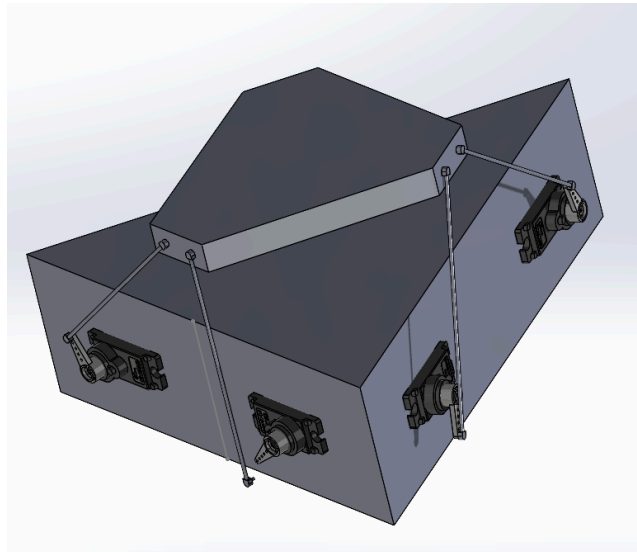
Prototype Stewart Platform design utilized in the above full system CAD. Utilizing 6 hobby servos to give a good range of motion for the system. Top piece will be replaced with a ping pong paddle sized platform.
